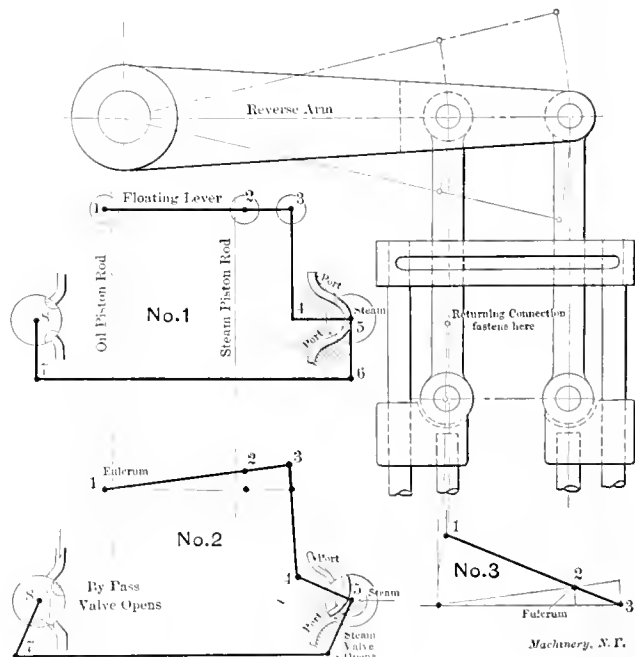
Diagram illustrating the Floating Lever Mechanism of Valve Gear.
